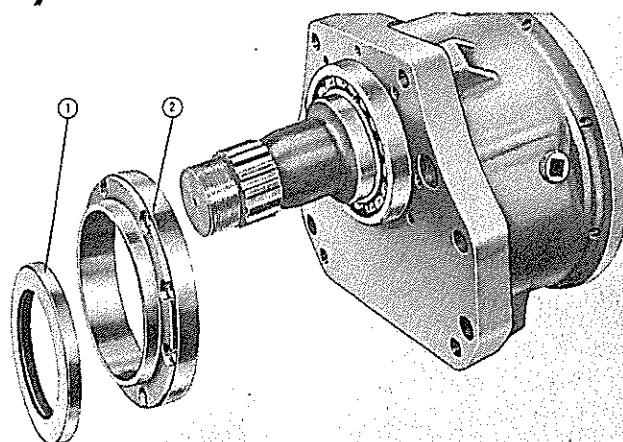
OIL SEAL AND RETAINER, REMOVED
